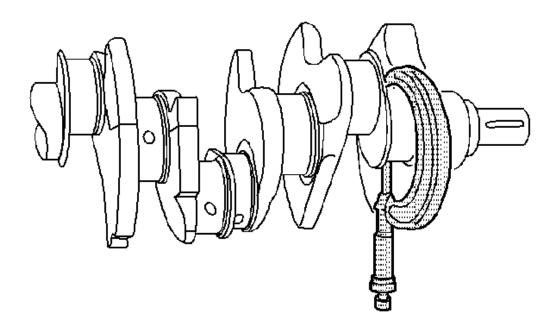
Measuring Crankshaft Bearing Journal Diameter Courtesy of GENERAL MOTORS CORP.
